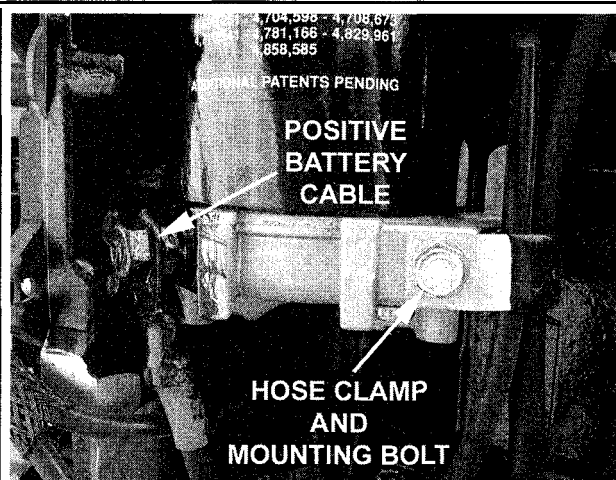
Starter motors on FICHT models use a single electrical connection (and sometimes as hose clamp), while carbureted models have the solenoid attached at the base of the starter
